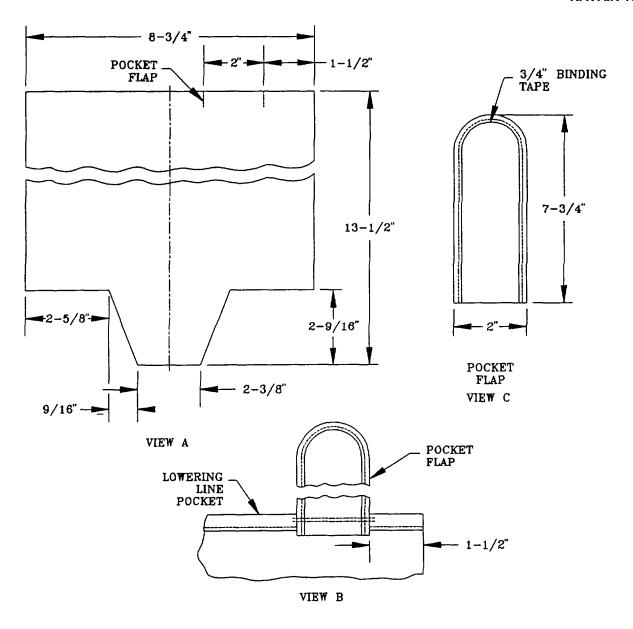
(Equipment Pack and Harness Assembly) Pocket Assembly, Lowering
